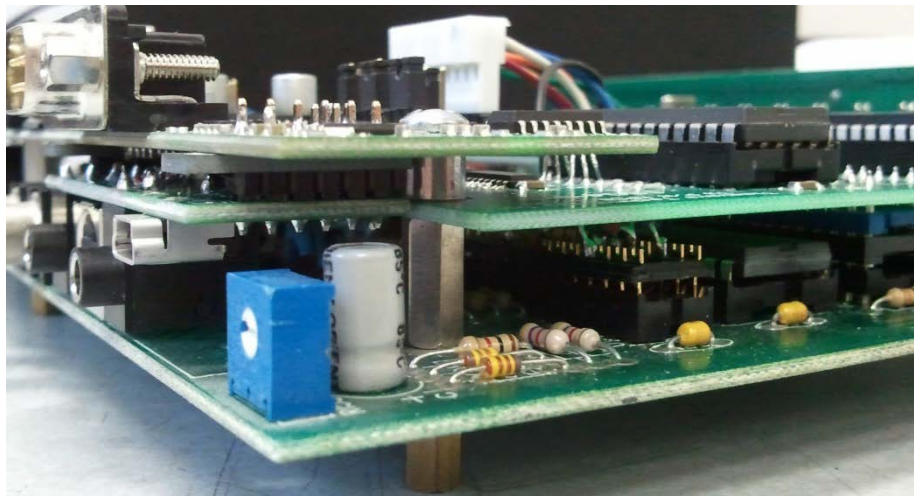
Side view of SC, MBX & main boards with spacer between SC board and MBX board
